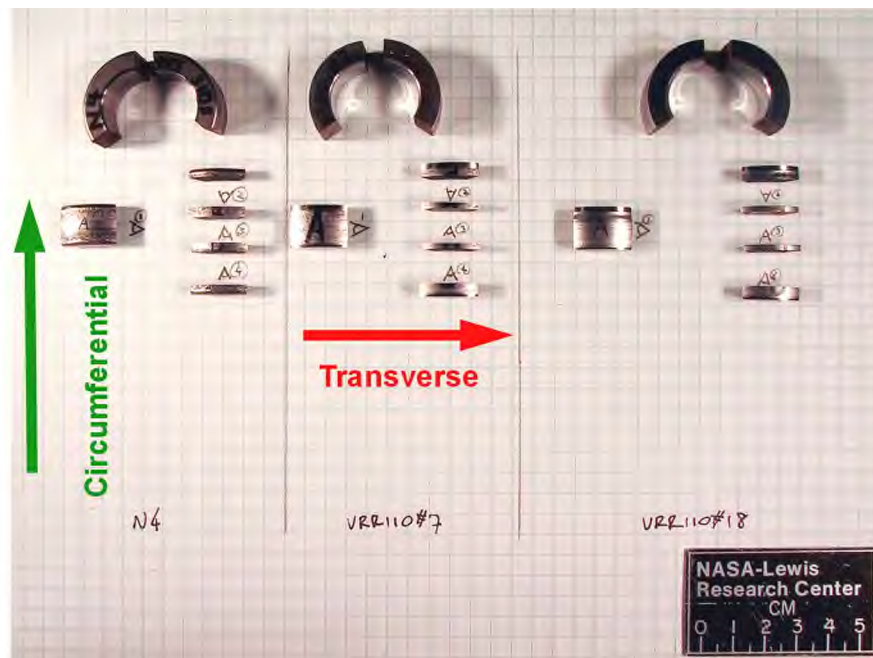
Pieces created by sectioning of tested rollers for metallography inspections.
